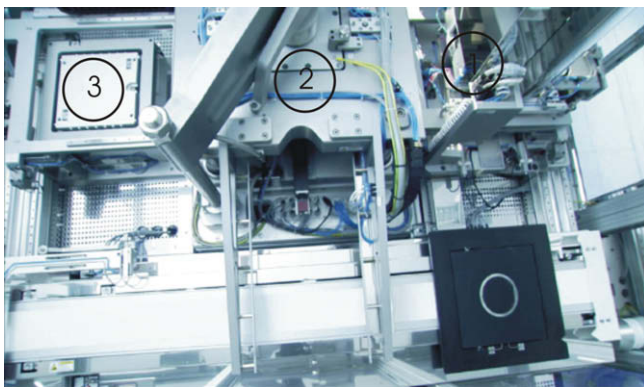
Close-up of the main modules of the EVG750; (1) alignment module; (2) imprinting module; and (3) cooling module; belt conveyer is shown at picture bottom side.
